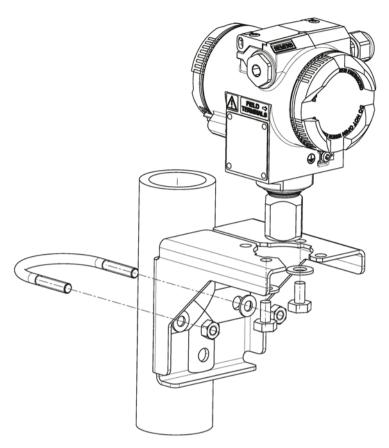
Fastening the pressure transmitter on the mounting bracket
